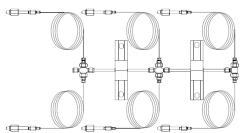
Gas manifold (additional valve for each branch is not shown here).
